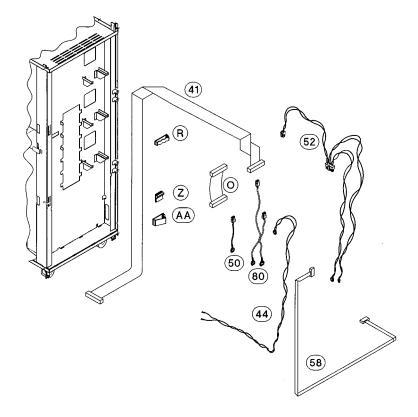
Exploded view for 3800ux/7100ux models (2 of 6)
